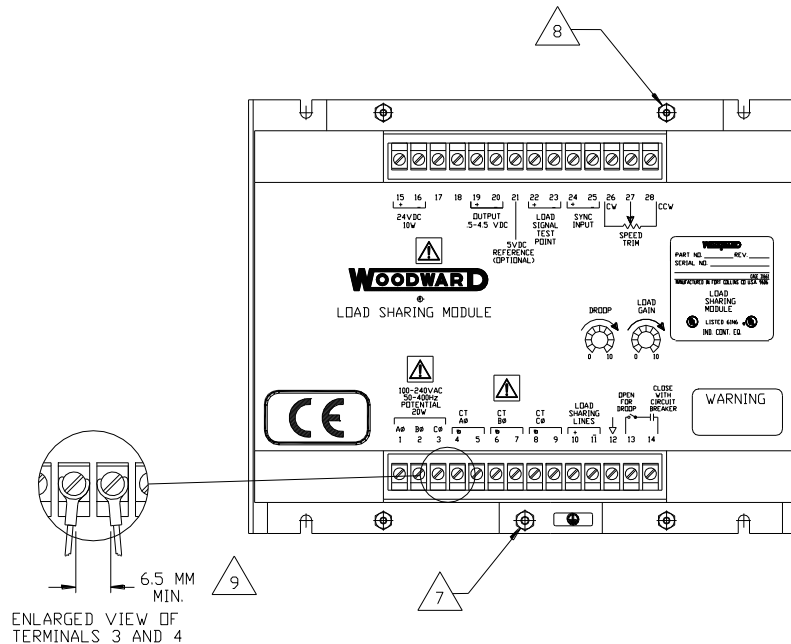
Drawing Notes and Enlarged View of Terminals 3 and 4
